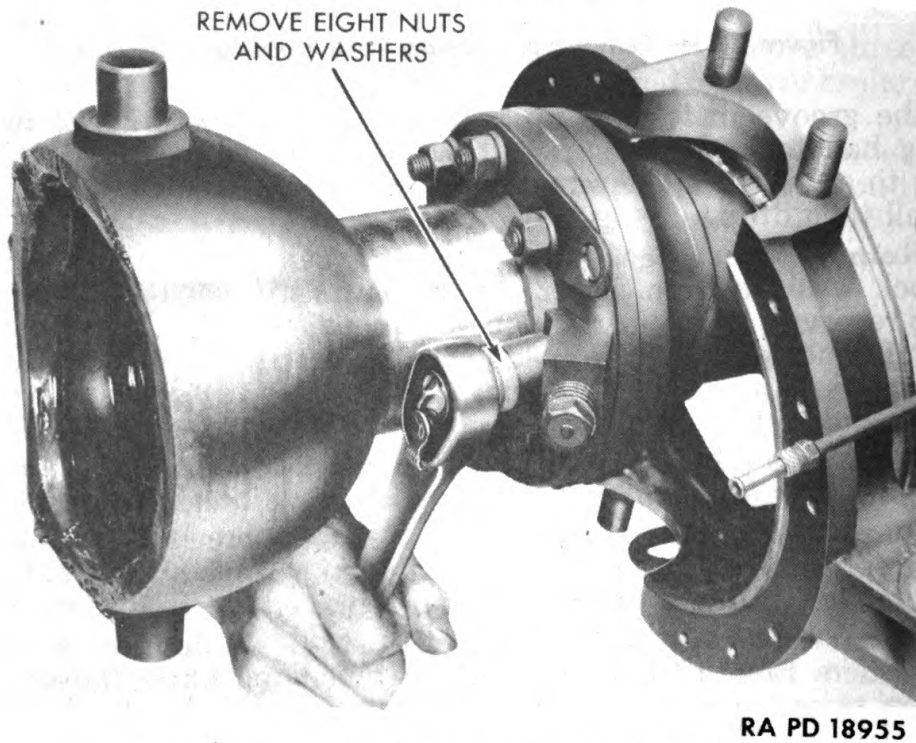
Removing Trunnion Yoke to Axle Housing Nuts
